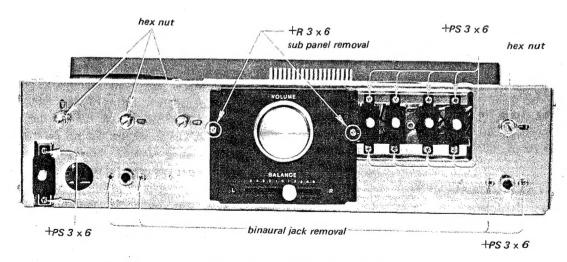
Front sub panel, switch, control and binaural jack replacement
